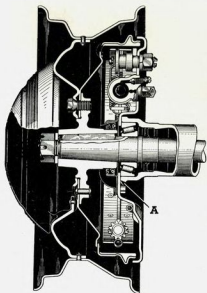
(Left)—1901-Rear Axle Bearing 1900 is similar. Shims "A" Control Axle Shaft Bearing Adjustment
